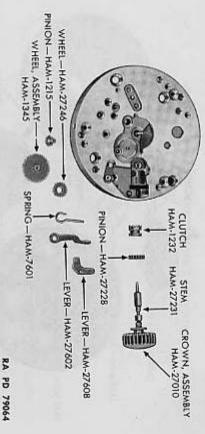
Hamilton Wrist Watch — Setting Mechanism Removed
